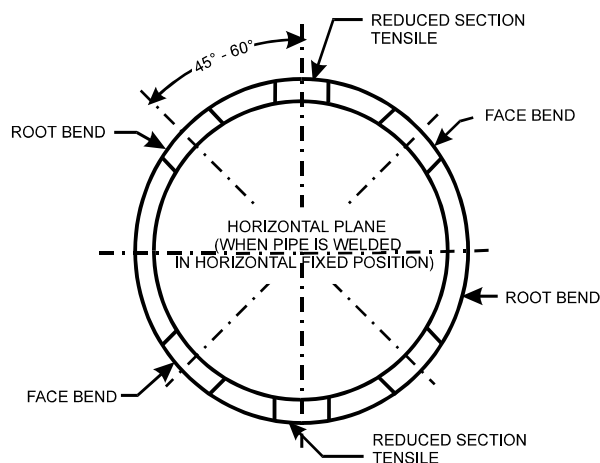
Location of Test Specimens for Job Size Pipe or Tubing 1/16 in. through 3/8 in. Wall Thickness (see 5.17.4.3)
